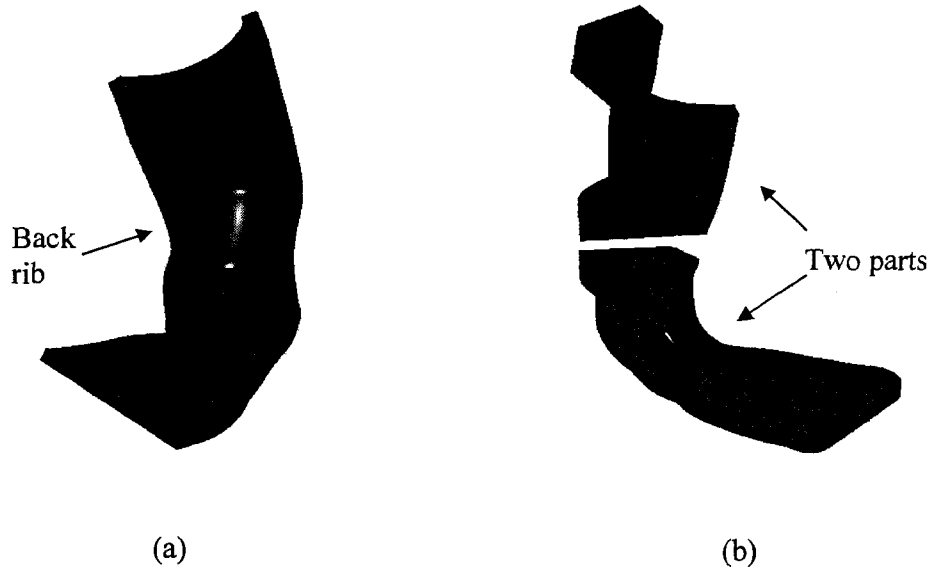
AFO with integrated arrangement for fixing double ball & socket joint (a) back view of designed rib (b) two piece front view (See color section)
